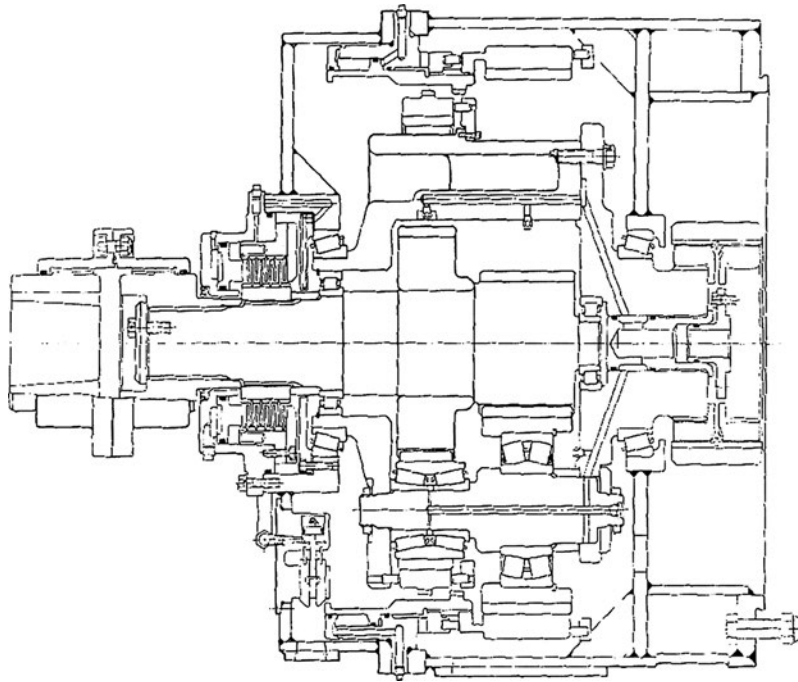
Truck-mounted, two-speed gear unit used to drive a piston pump for oil-well fracturing. (Courtesy of Sier-Bath Gear Co., Inc., North Bergen, New Jersey.)
